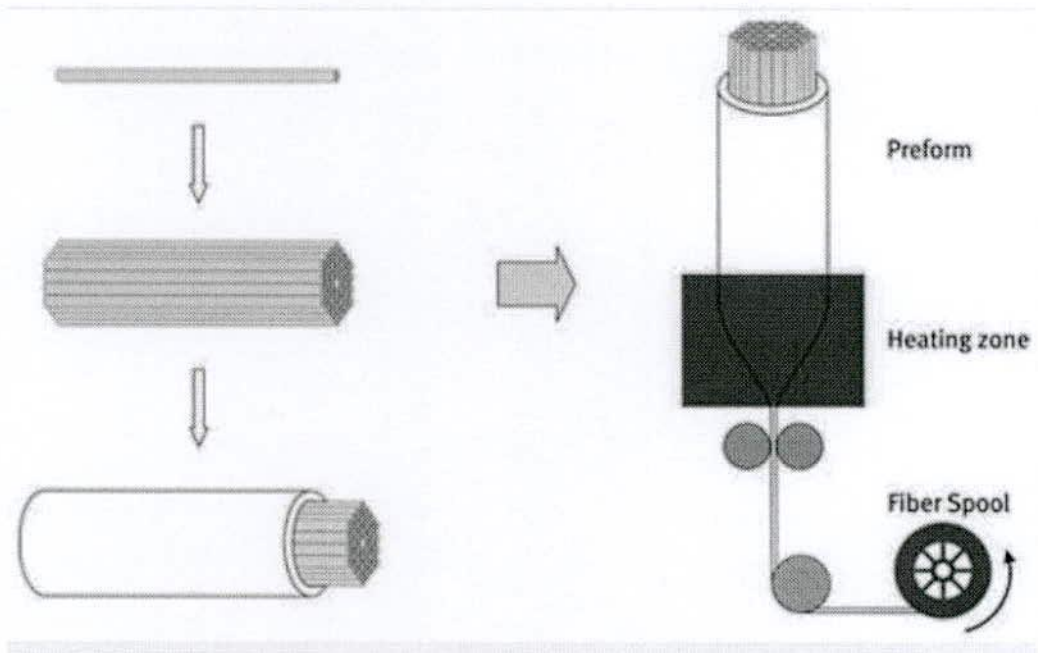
Conventional setup of fabricating regular shaped PCFs
